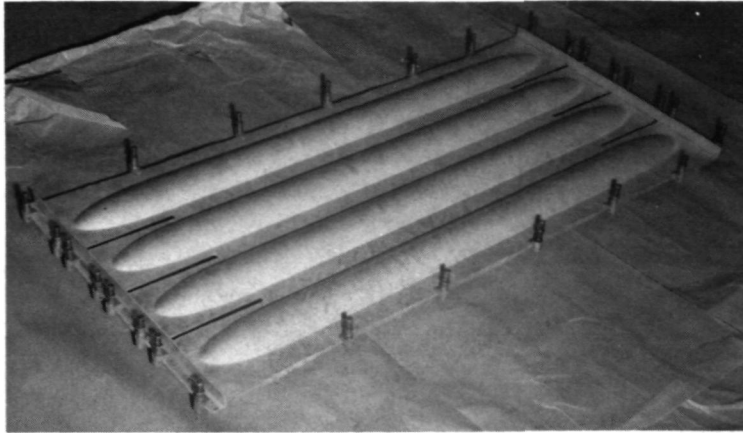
PANEL HALVES CLAMPED TOGETHER PRIOR TO SEAM WELDING
